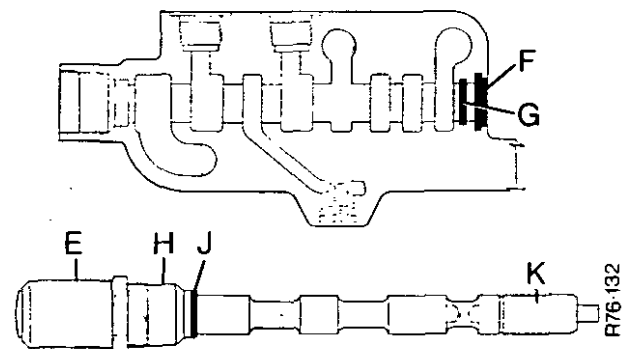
REPLACEMENT OF SEALS FOR THE VALVE SPOOL
